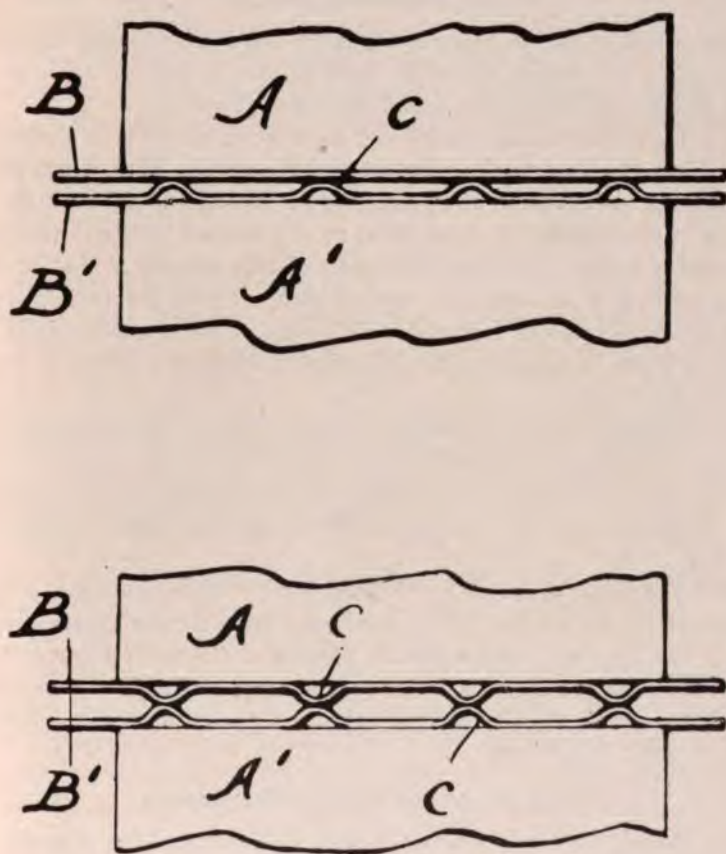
Diagram illustrating point welding. A, A-1—Jaws of spot welder. B, B-1—Pieces of metal to be welded. C—Points raised by indenting. Welds take place at point C.
